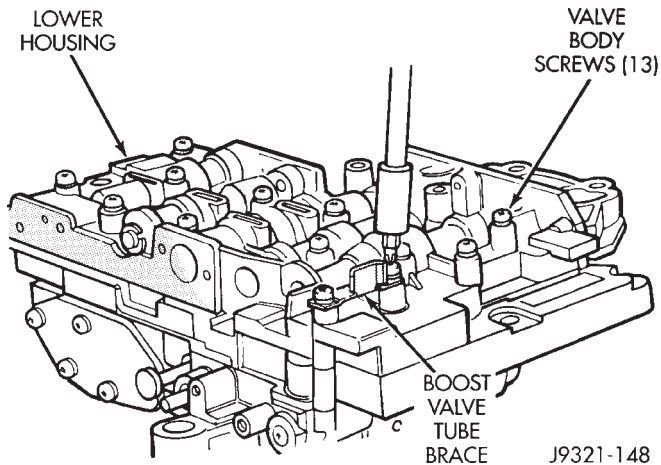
Valve Body Screw And Tube Brace Location—46RH
